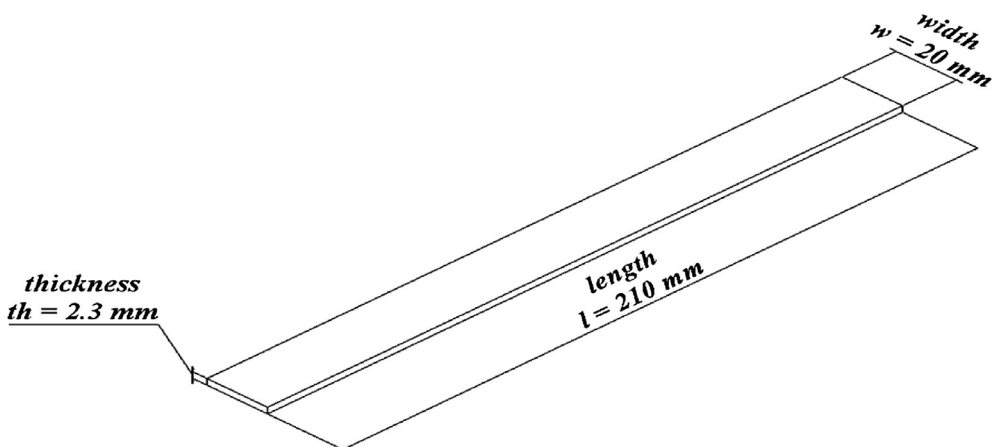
Schematic illustration of the specimen dimensions used for static and fatigue tests (in mm).
